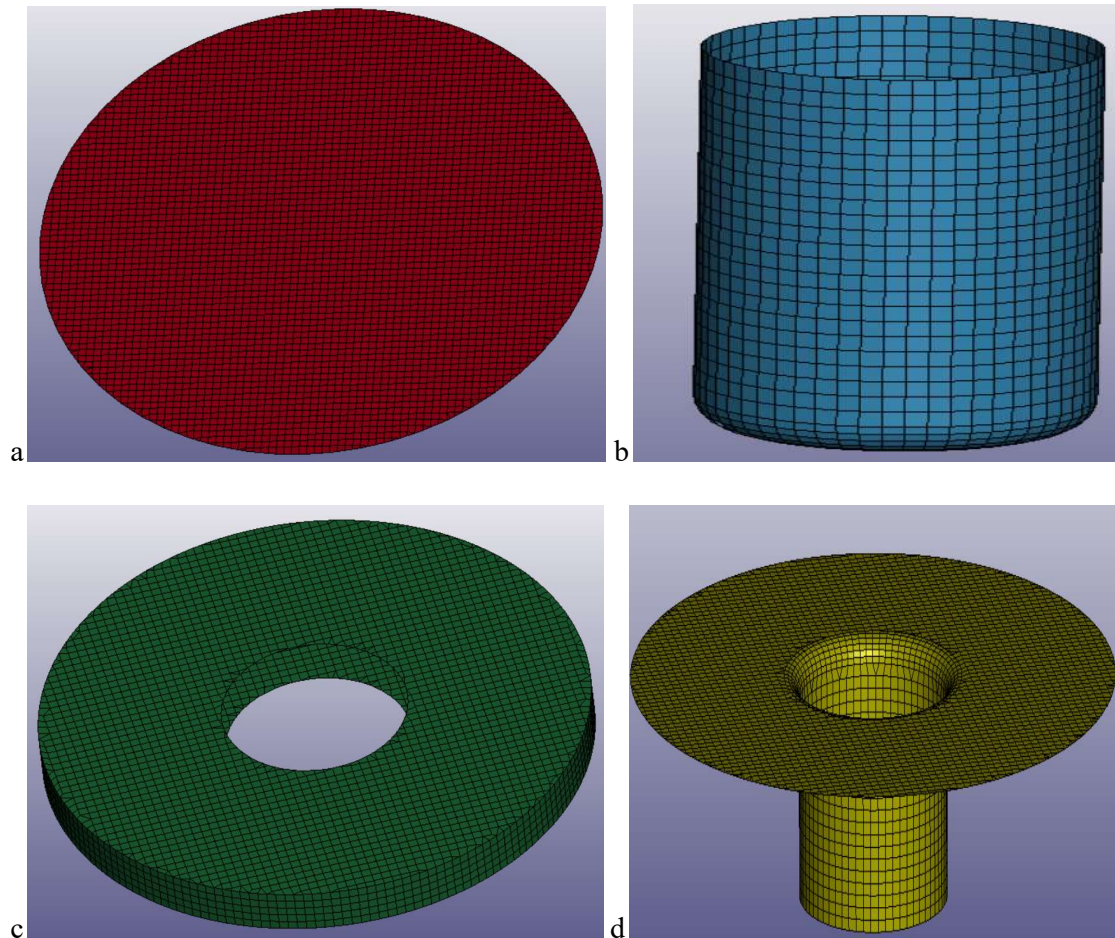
Meshing of parts a) Sheet b) Punch c) Blank holder d) Die
